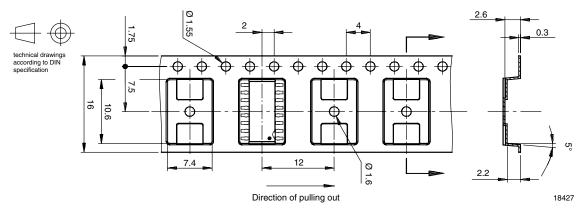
TTape and Reel Packing for TCMT460X (2000 parts per reel)
